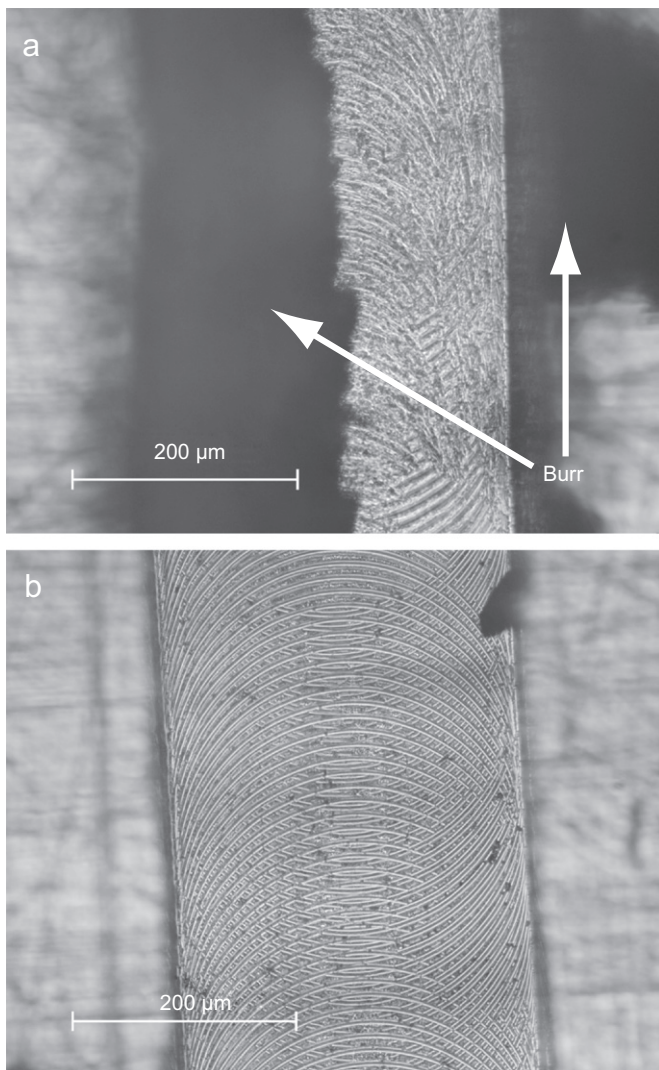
Optical images of representative end milled channels in 6061-T6 aluminum using (a) uncoated end mill and (b) diamond-coated end mill.
